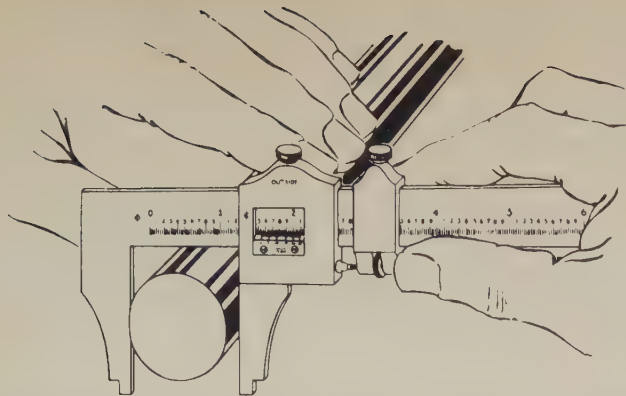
Using the vernier caliper to measure an outside diameter.
